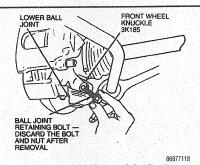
Drive the bolt out of the front wheel knuckle using a punch and hammer, then discard the nut and bolt and replace with new ones during installation
